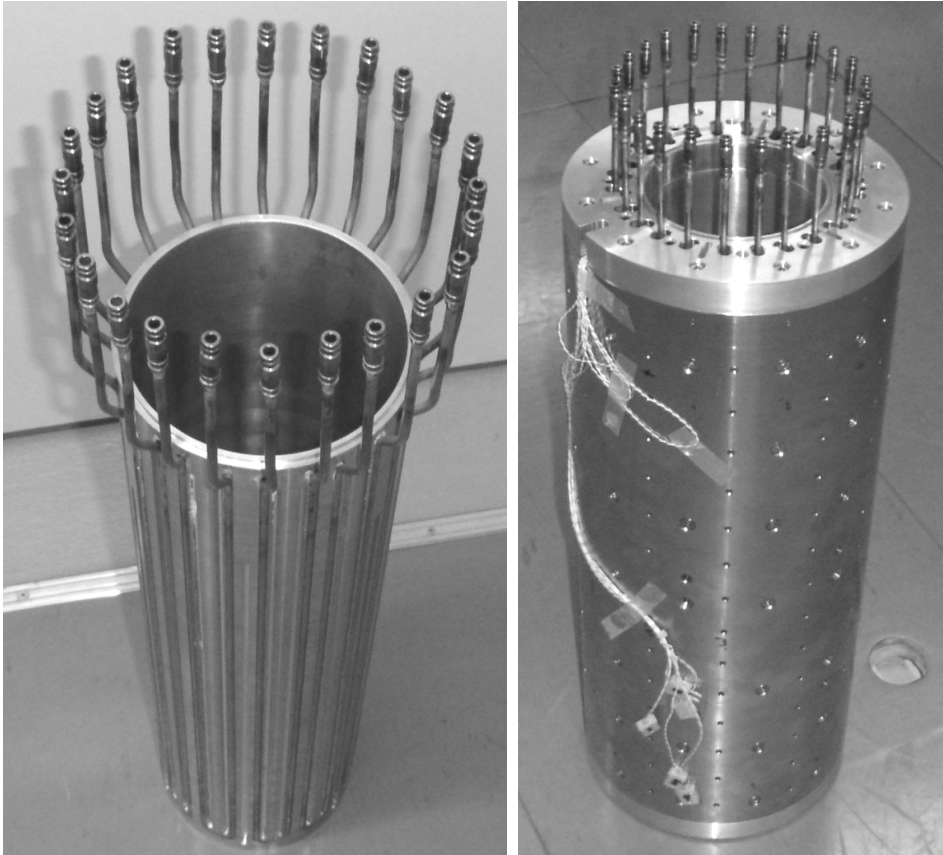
(a) Inner part of the plasma chamber and (b) the new MMPS plasma chamber assembly completed.
